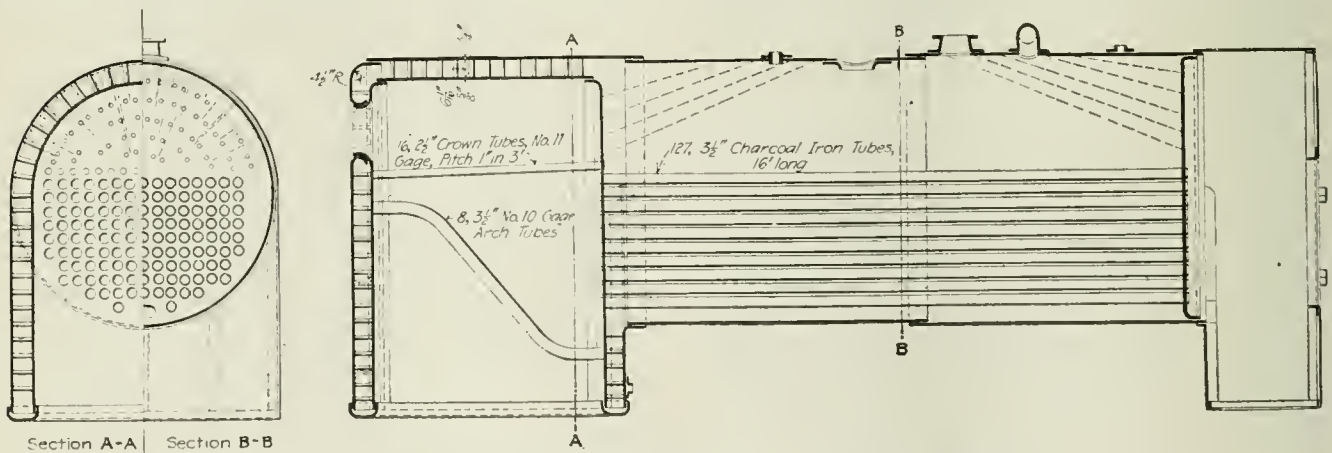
SECTION THROUGH DRY CROWN-SHEET BOILER
